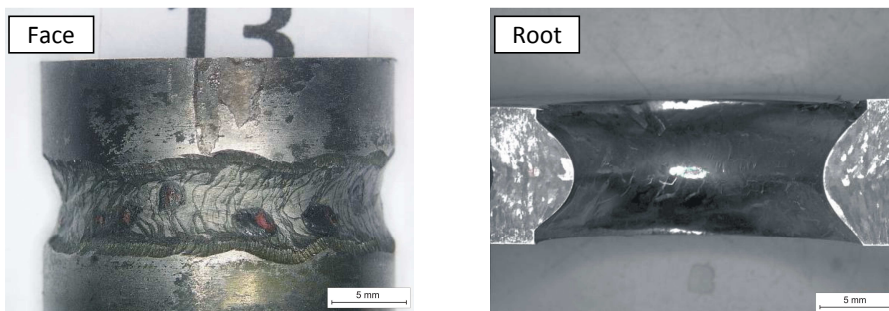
Face and root of the fusion weld of a tube of DMV 617 mod alloy, made with a disc laser
